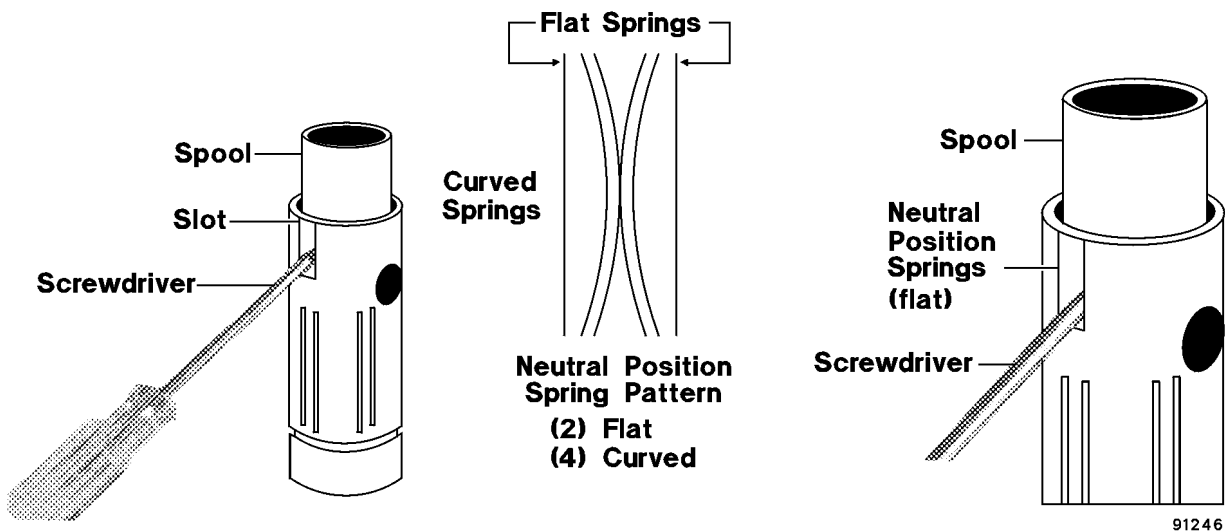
NEUTRAL POSITION SPRING INSTALLATION
